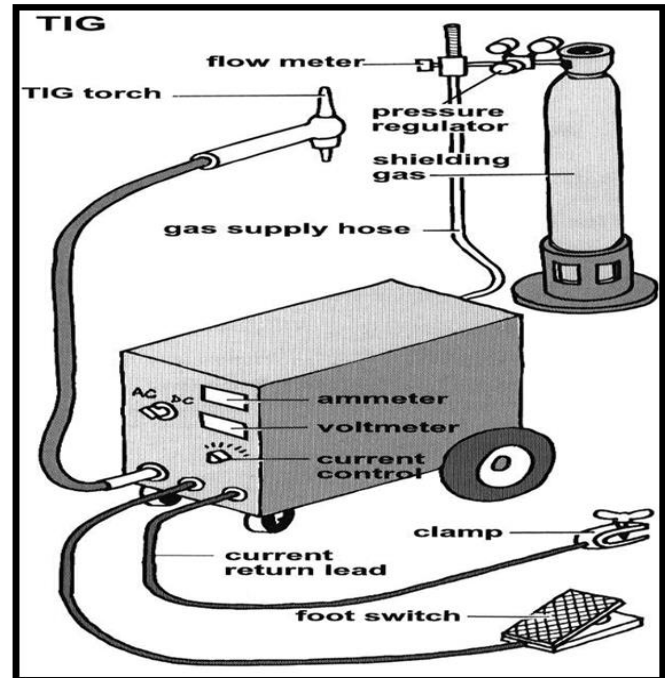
Schematic Diagram of TIG Welding Process
